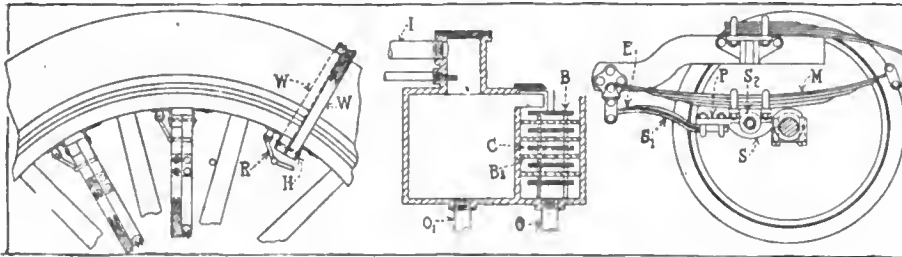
Thiesen anti-skidding device. Fig. 2—Still muffler. Fig. 3—Neuberth spring suspension
